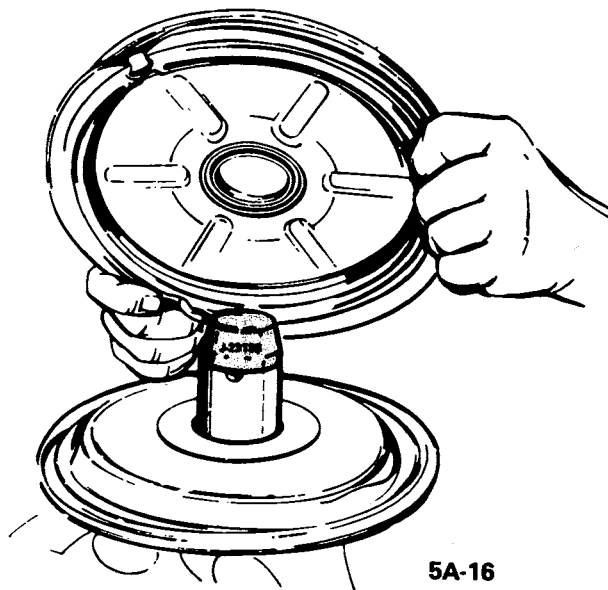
A-16 Positioning Housing Divider Over Secondary Bearing Protector Tool J-23188
